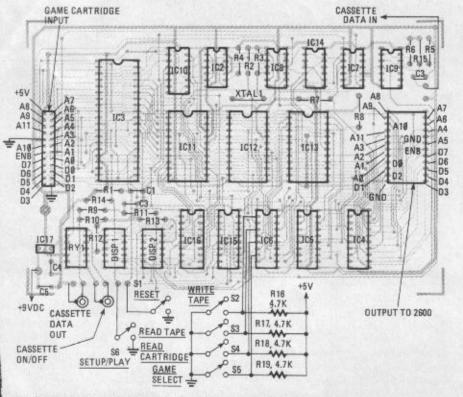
PARTS-PLACEMENT DIAGRAM for the main board. Note the connector pinouts. You will have to wire up a cable to connect the main board to game cartridges and to the adapter board.
